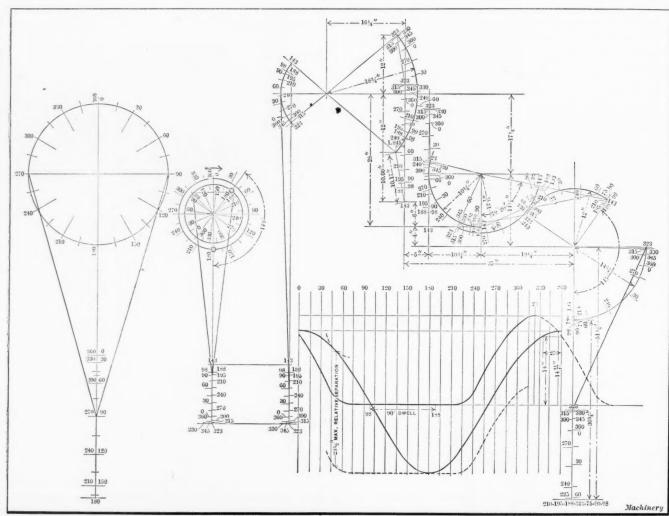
Diagram showing Dwell of Blank-holder during the Drawing Operation
